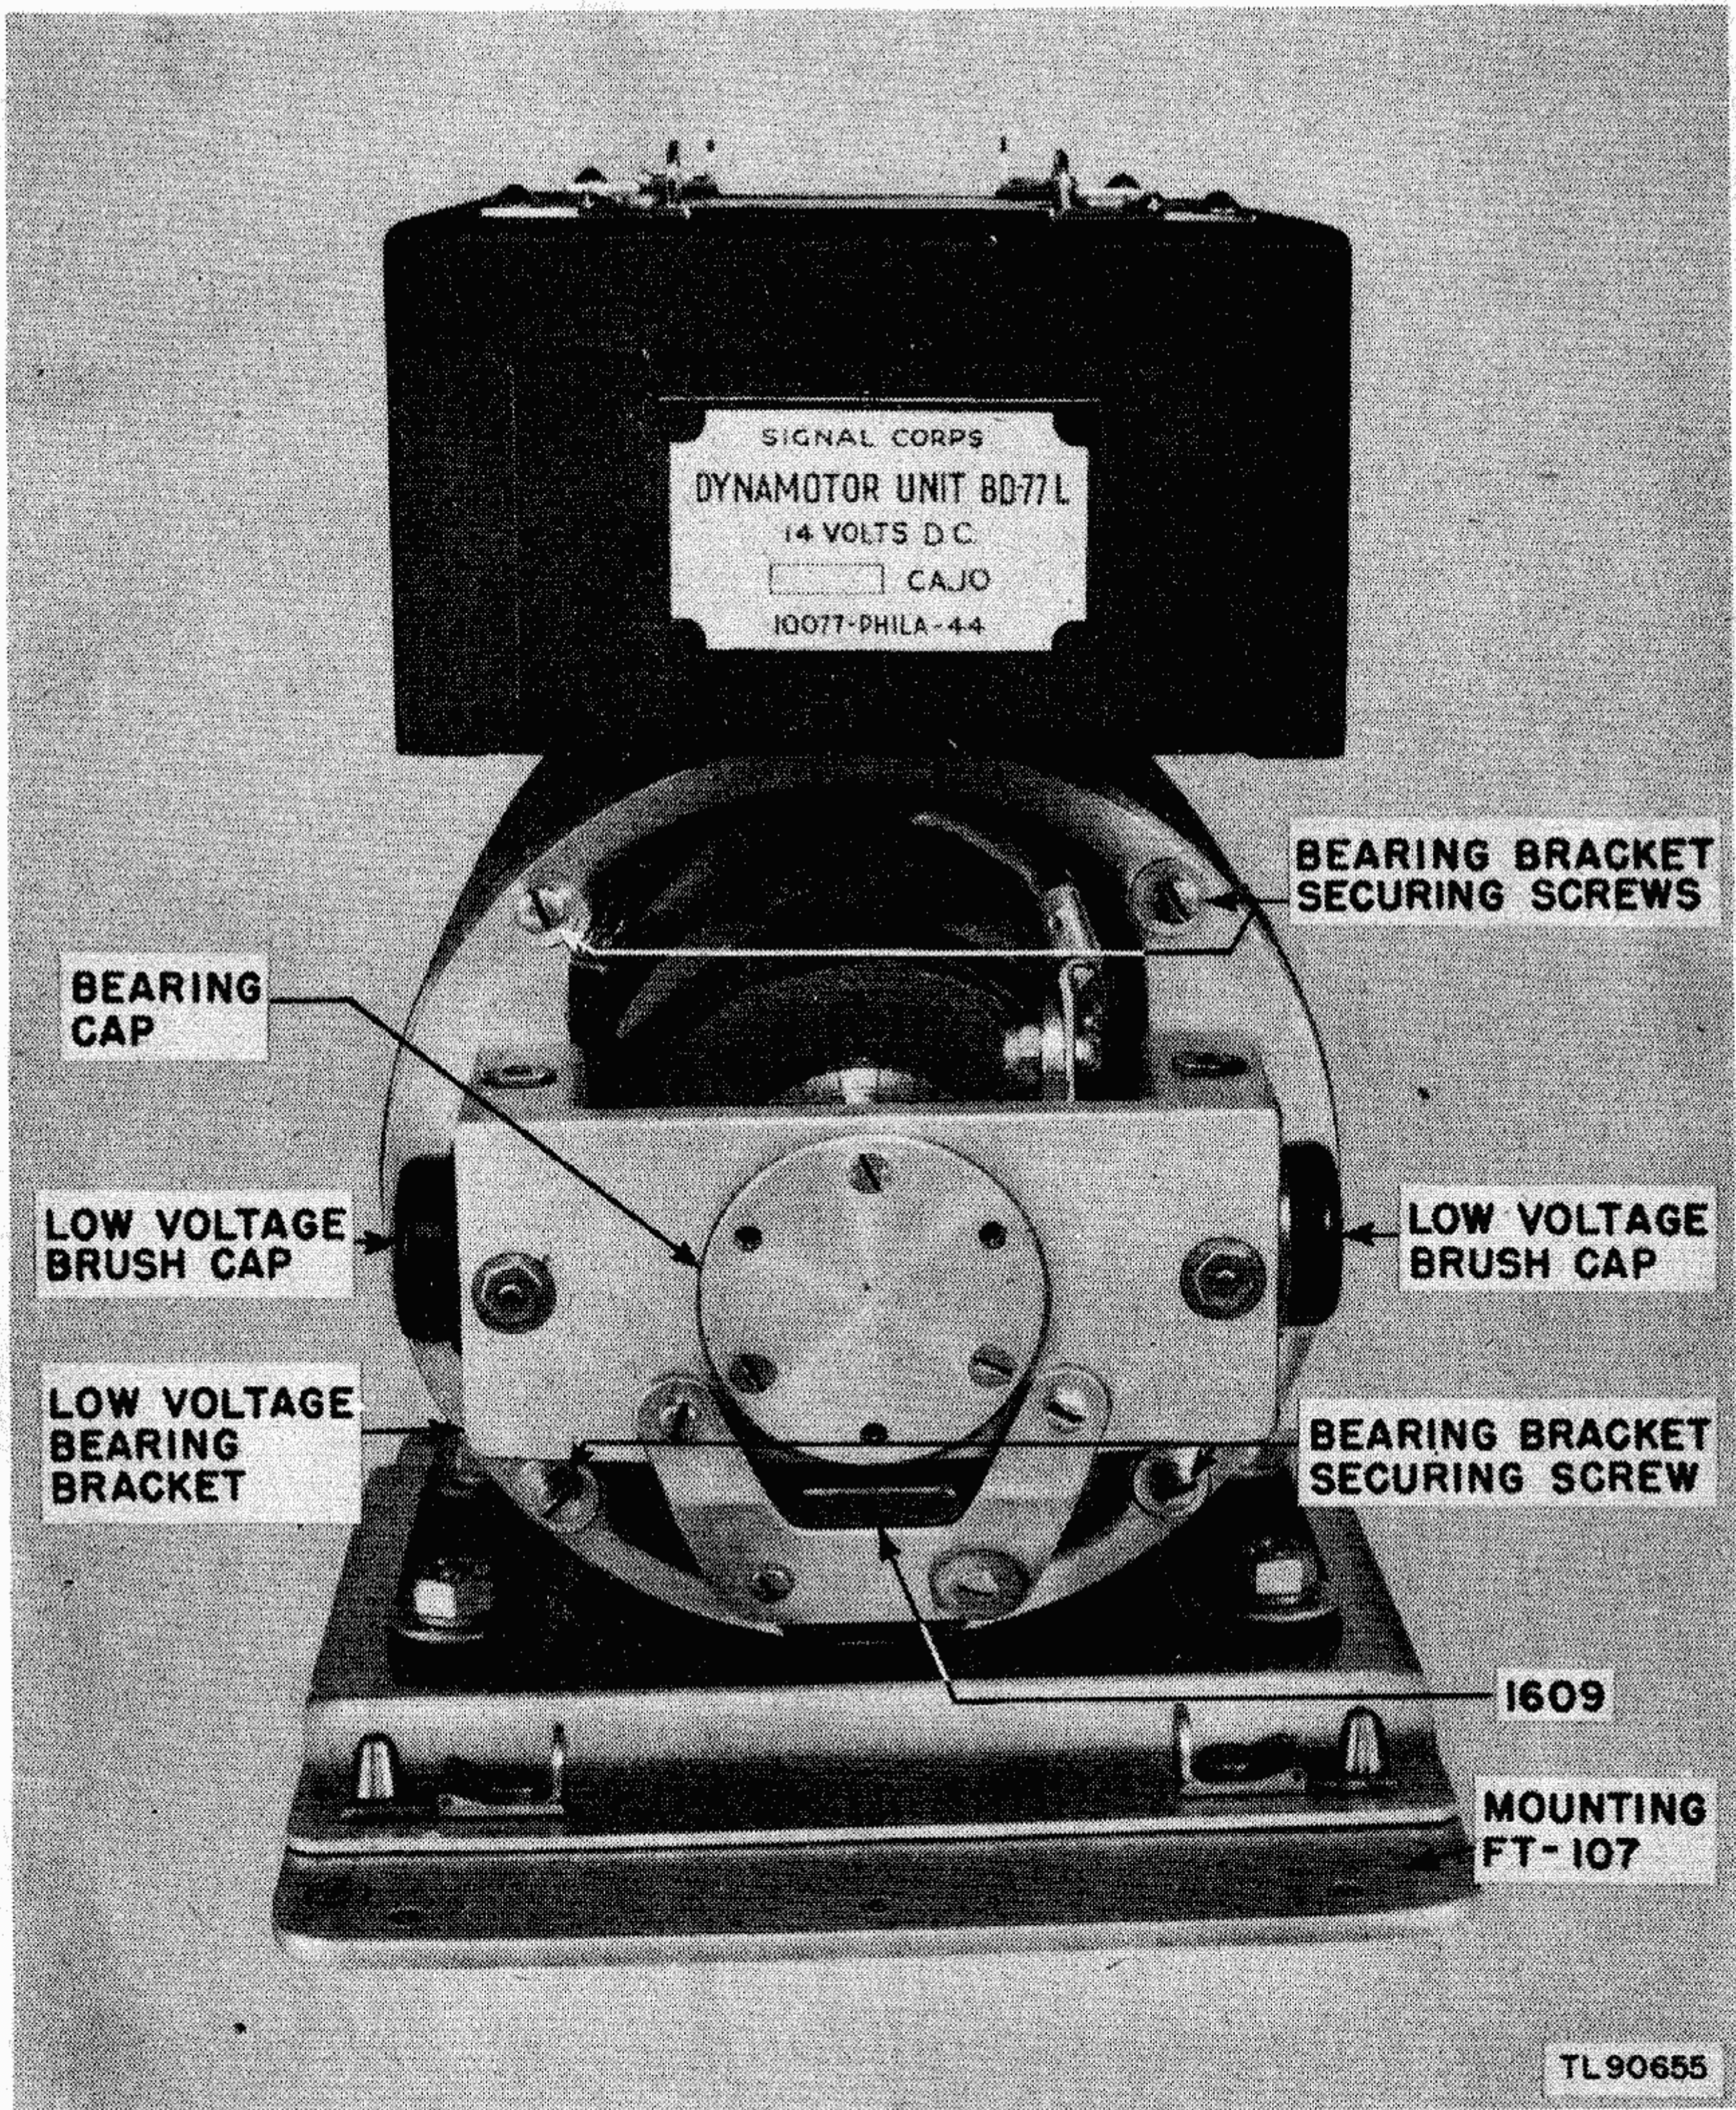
Dynamotor Unit BD-77-L, Low-voltage End, Dynamotor End Cover Removed.
